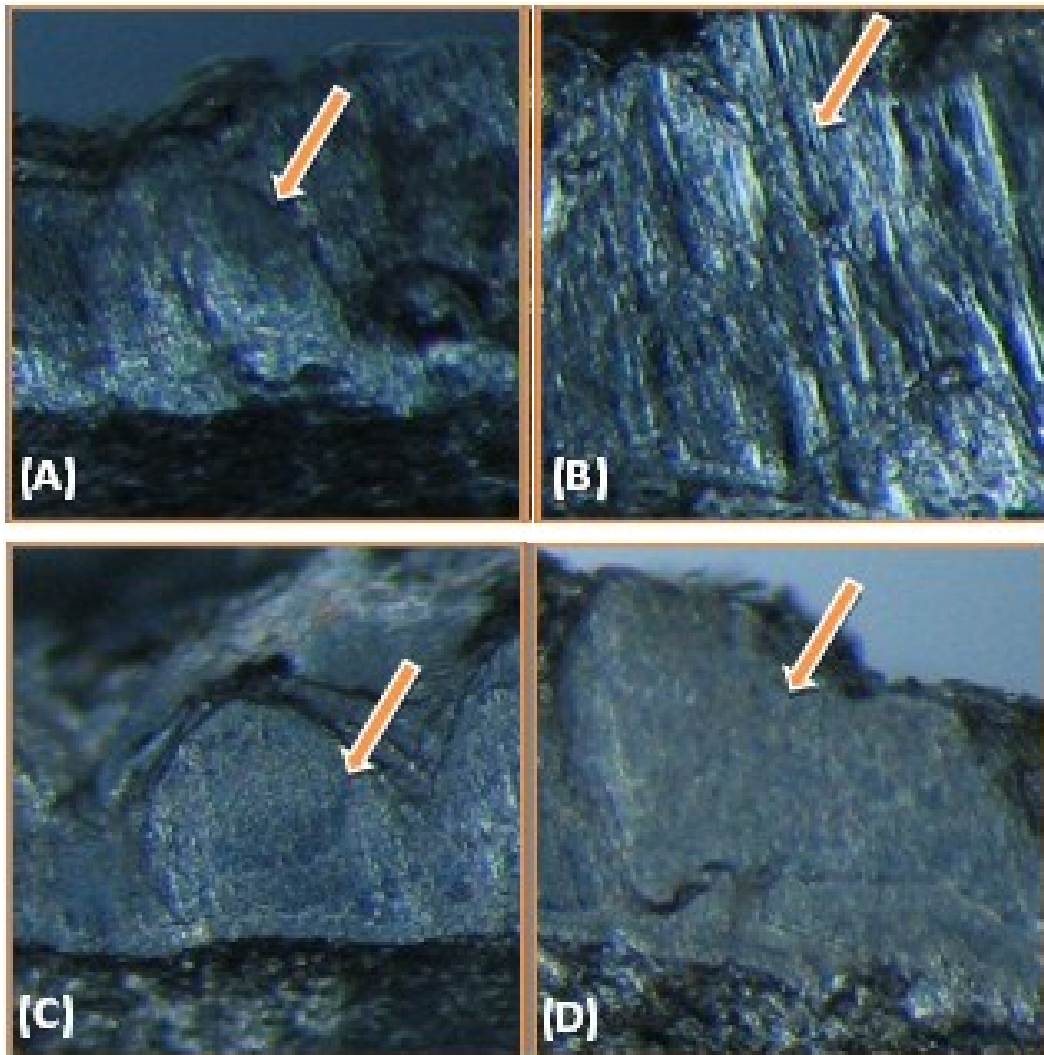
Representative instances of wear mechanisms on coated WC cutting tools used for dry end-milling Ti-6Al-4V (40X). (Each image size is 10mm x 10mm). (A) Adhesive wear indicated by micro-chipping or a “chunk” of material pulled away, (B) Abrasive wear indicated by wear scars or grooves on the tool caused by harder particles (or inclusions), (C) Chemical wear indicated by discoloration on the tool surface, (D) Diffusive wear indicated by smooth areas on the tool.
